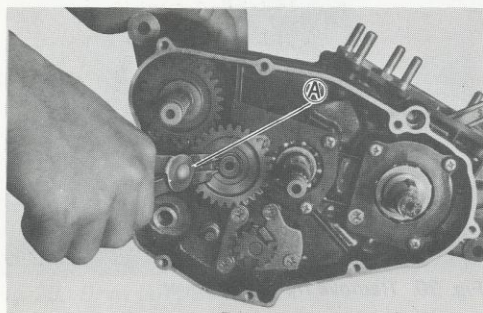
Remove kick idle gear, using special tool A (09920-70111).
